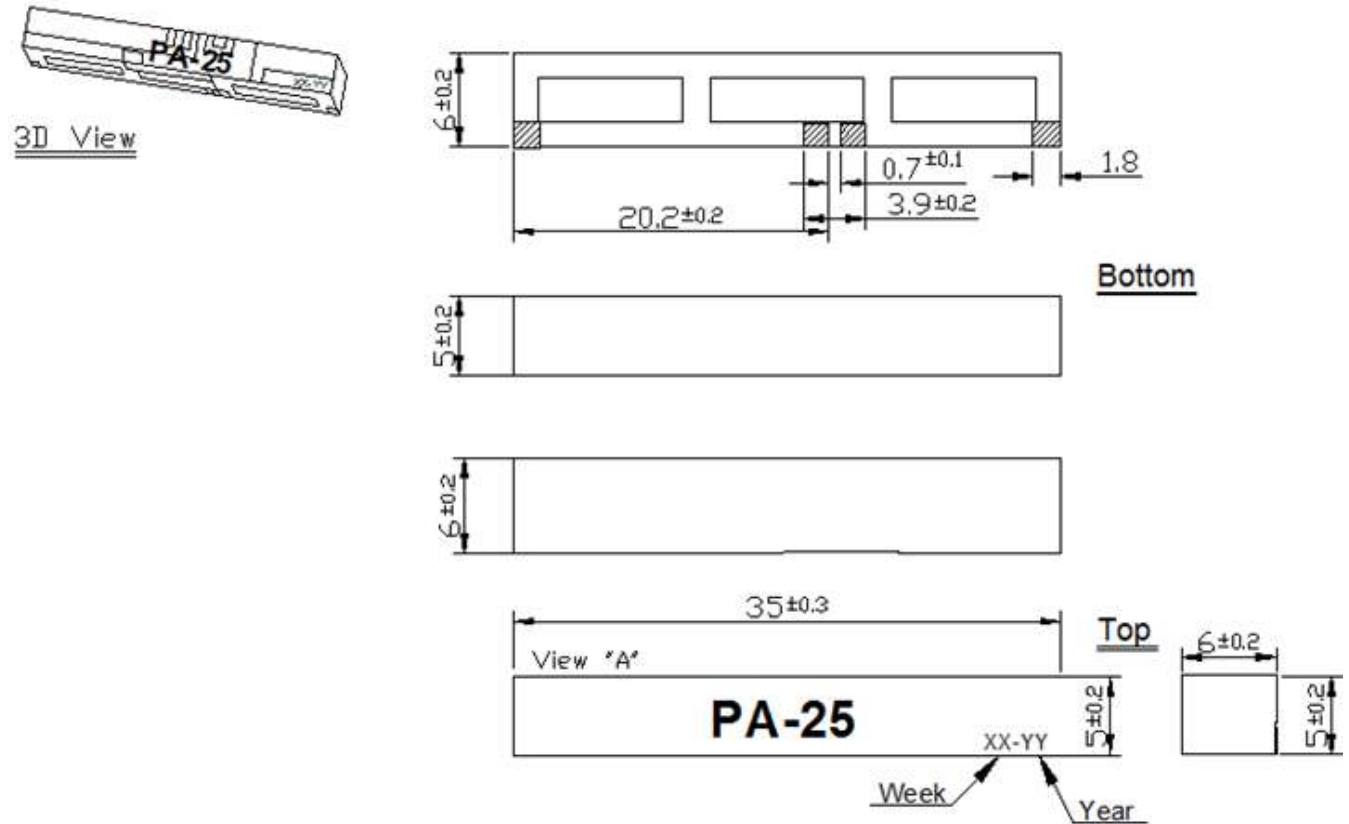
Mechanical Drawing of the PA.25 Antenna.
